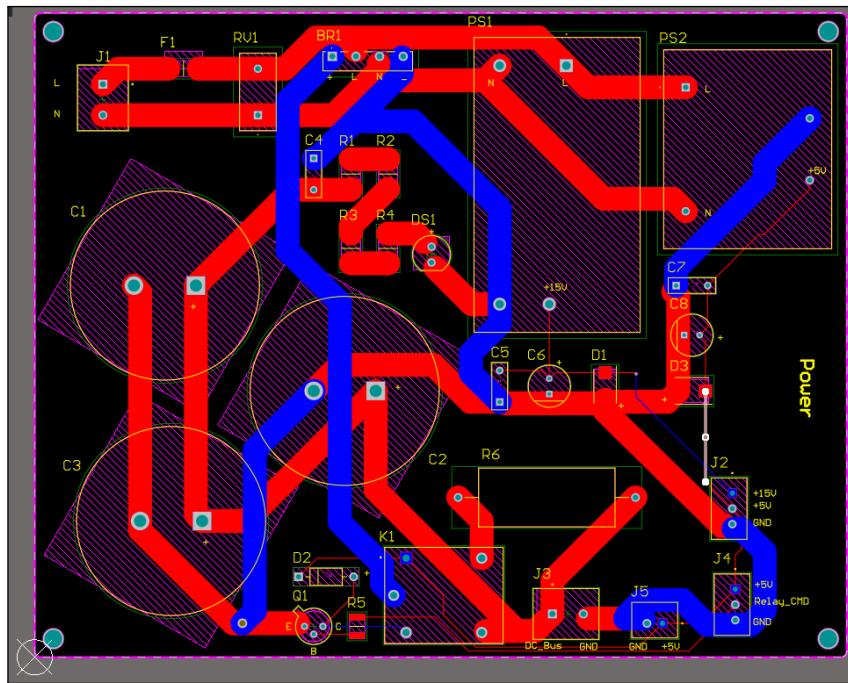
Power Circuit Bottom Layer PCB 2D Layout
